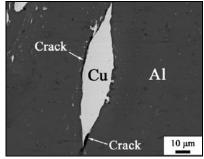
showing SEM backscattered electron image of copper particle suraounded by aluminum and cracks forming barier betwwen them, this defect foundin the stir zone when welding AI to Cu in FSW when inproper weld parameters used in a research done by Xue et al [54].
